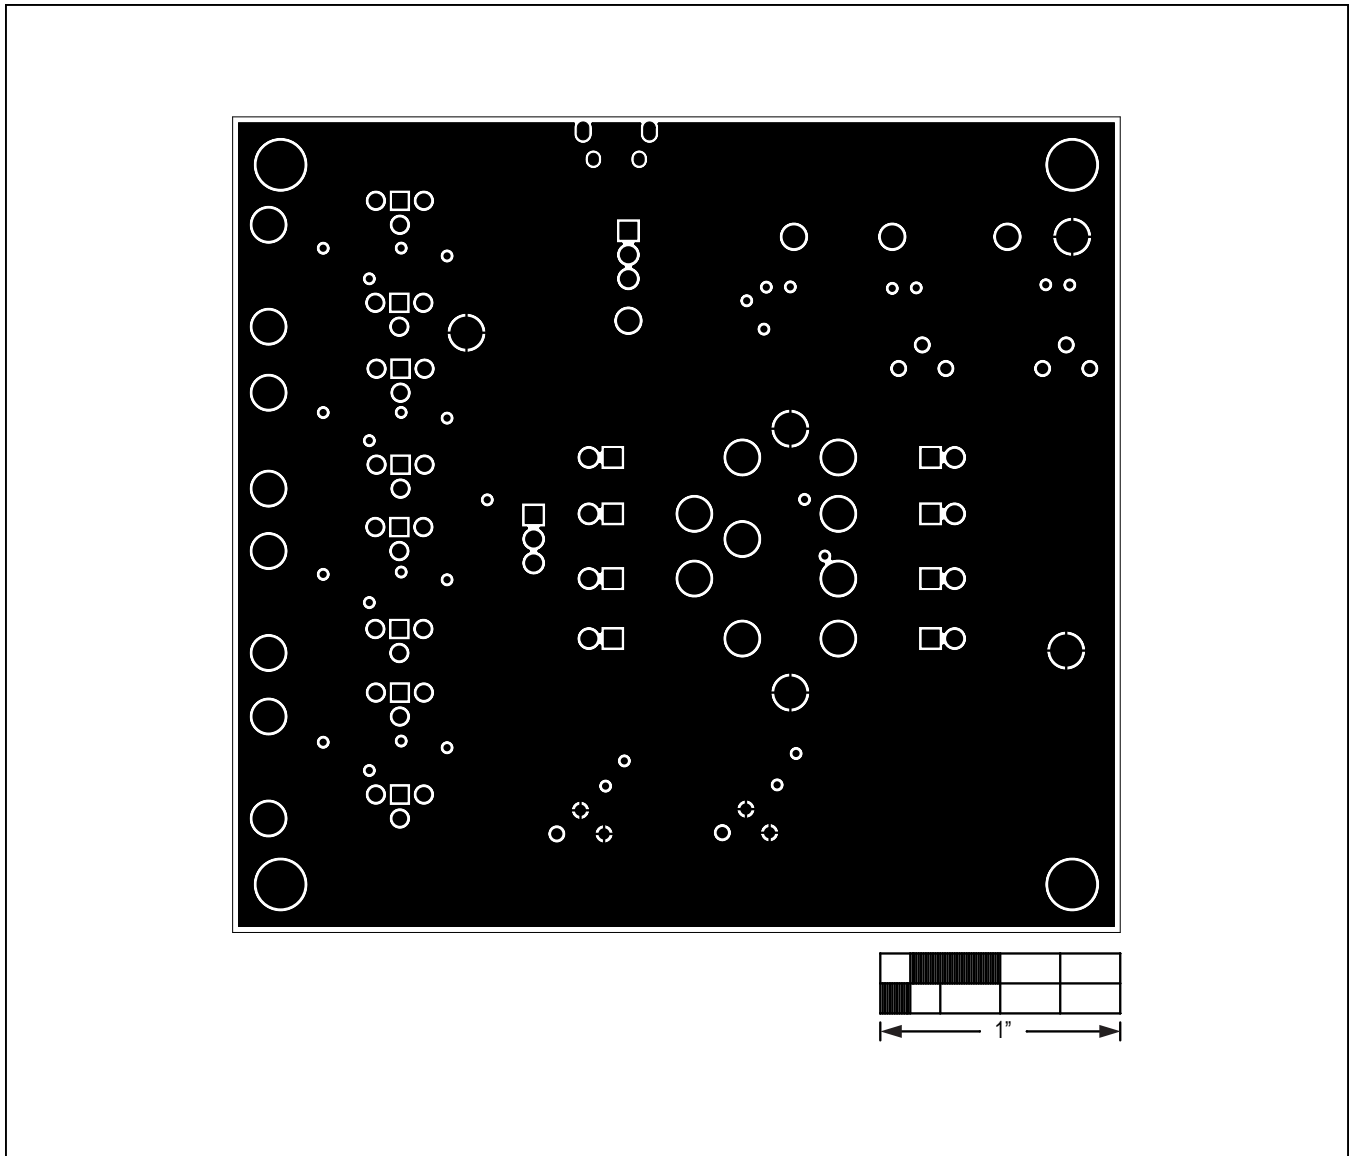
MAX14611 EV Kit PCB Layout—Layer 2
